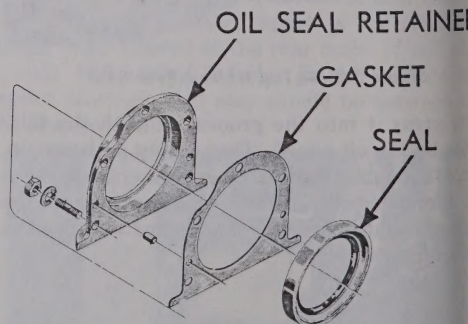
Exploded View of Oil Seal Retainer and Seal
